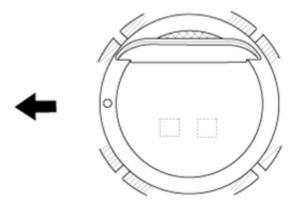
Installing Piston Rings Courtesy of KIA MOTORS AMERICA, INC.
